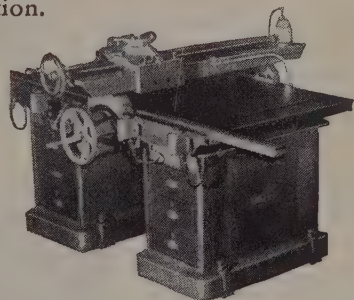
Welded Steel Base for Wales-Strippit Company, N. Tonawanda, N. Y. Designed using the Lincoln WELDesign System.
